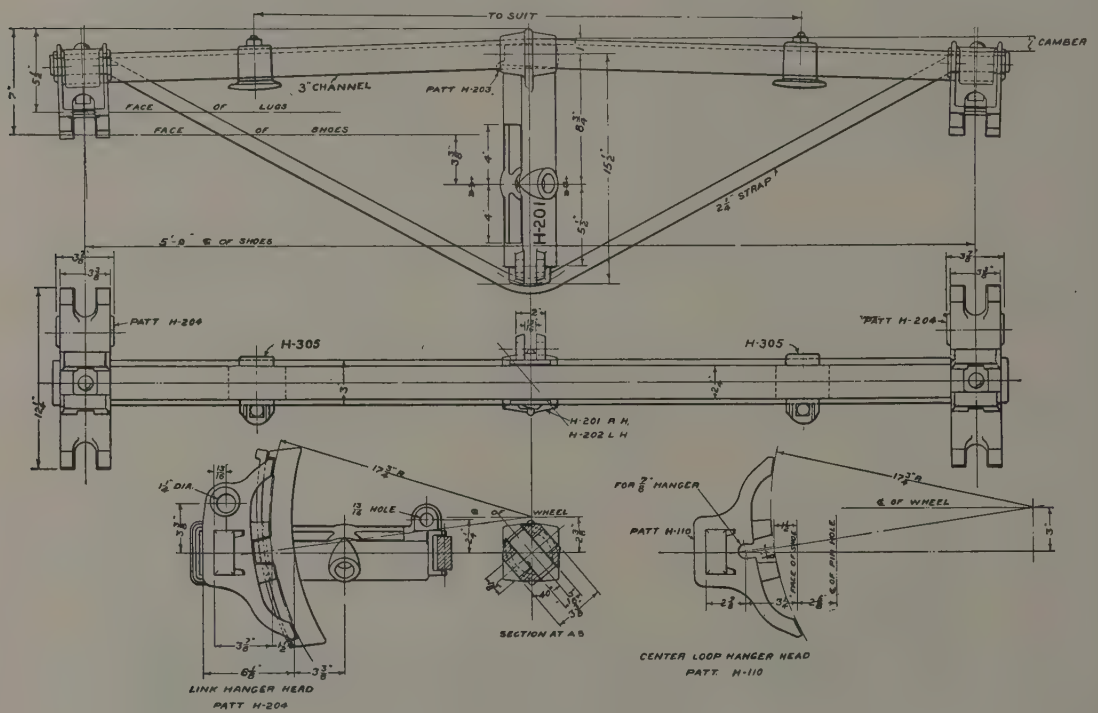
Huntoon Standard Brake Beam for Four-Wheel Passenger Car Trucks. Joliet Railway Supply Company.
